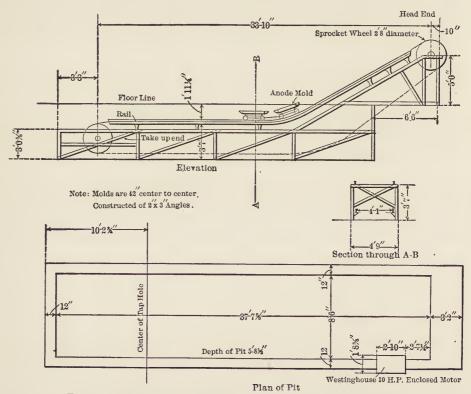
DETAILS OF MECHANICAL CASTING APPARATUS.
